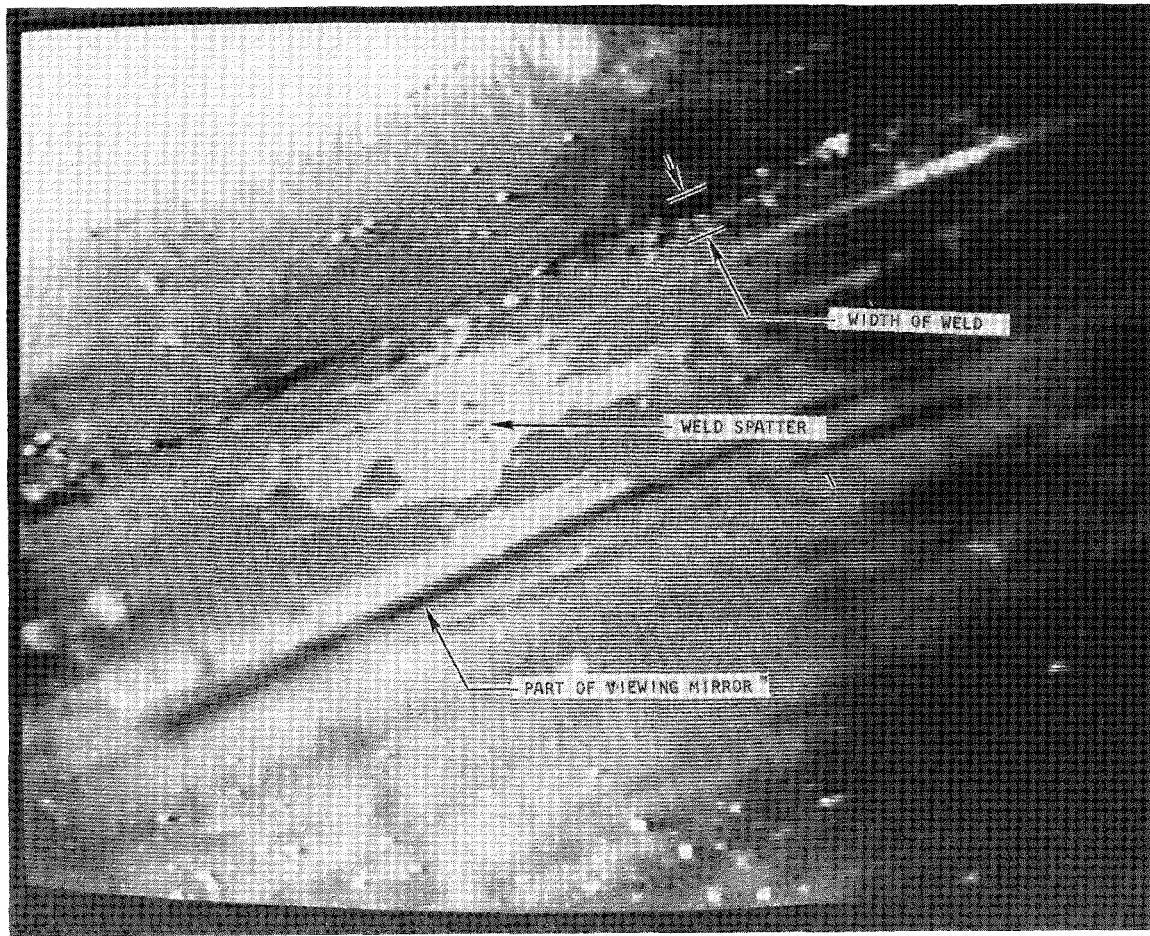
Vertical weld viewed with 90° lens.
